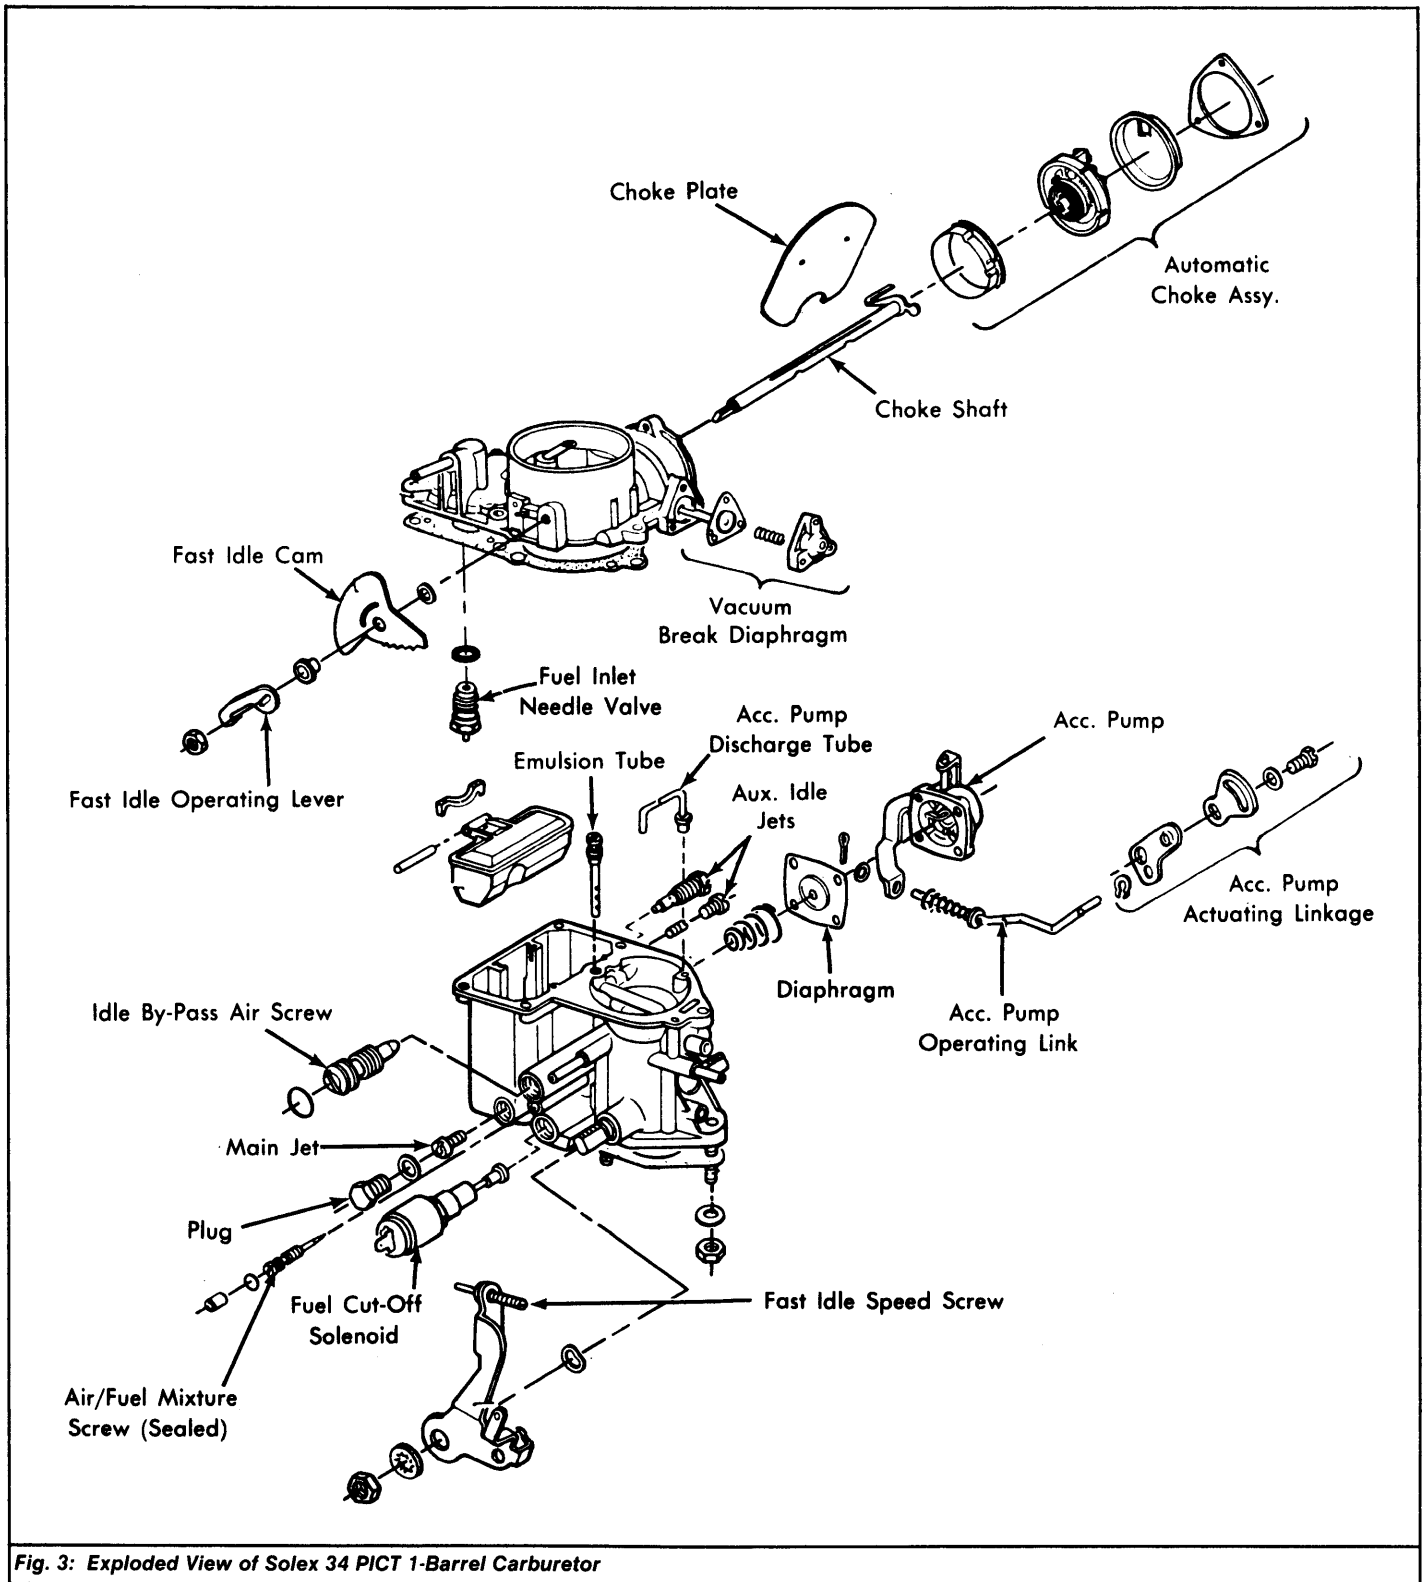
Exploded View of Solex 34 PICT 1-Barrel Carburetor
